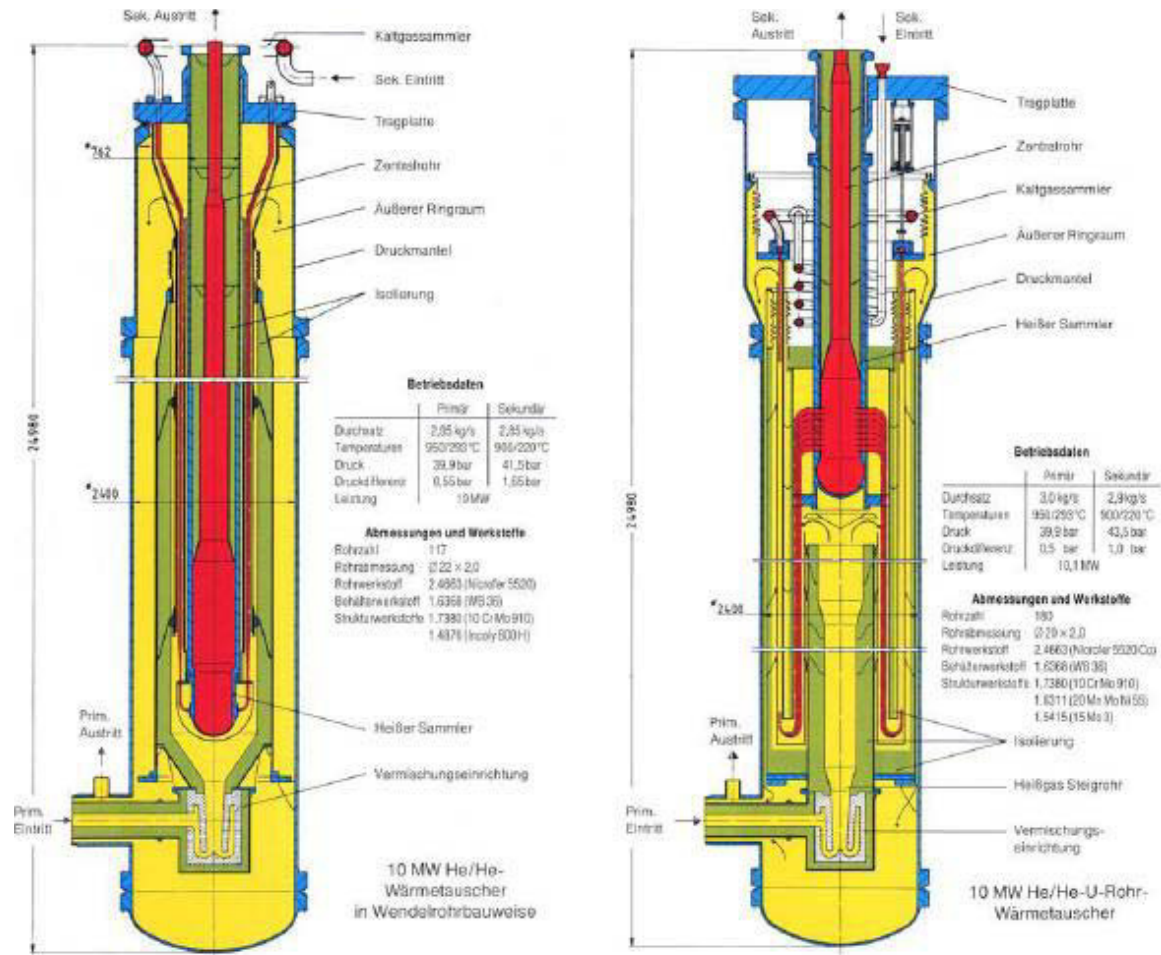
Two IHX components tested in KVK - Helical tube bundle by Steinmüller company (left), U-tube bundle by Balcke-Dürr company (right)
